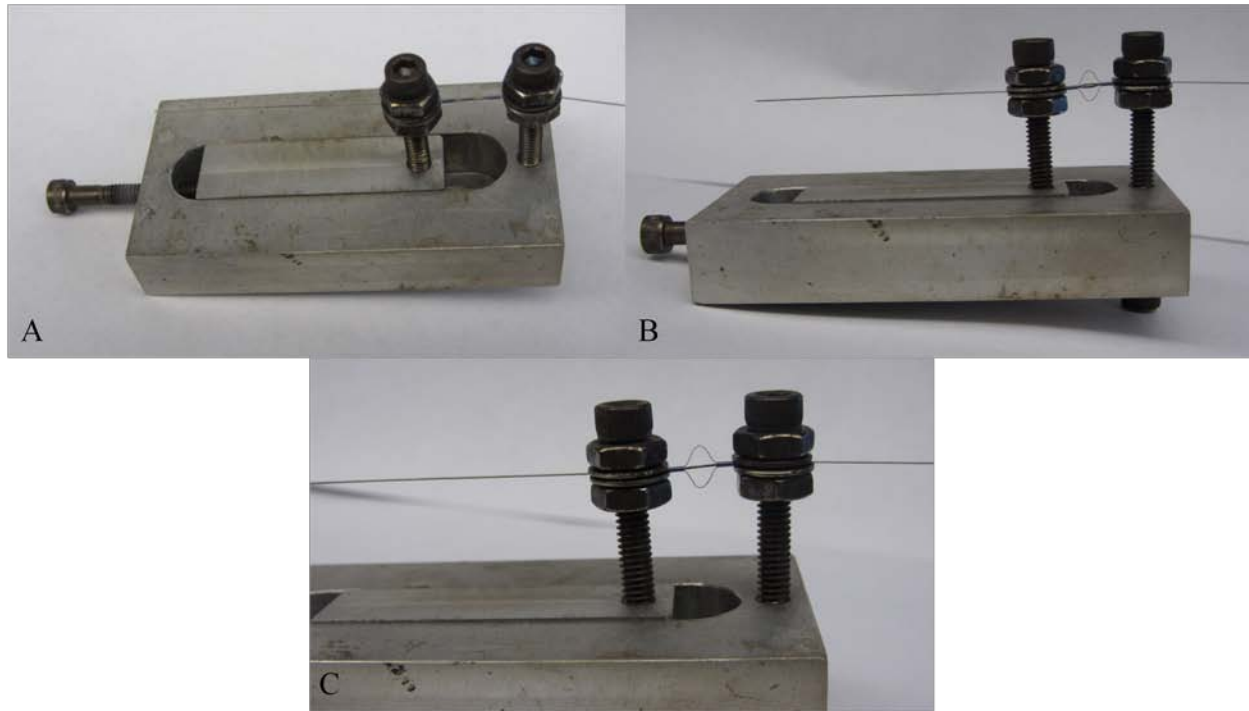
Shape setting the nitinol support piece. Pane A shows the tube placed between the faces of two washers. B shows the axially compressed tube as the screw on the right hand side is rotated inwards. C shows the final compressed support piece before it is placed in the furnace.
